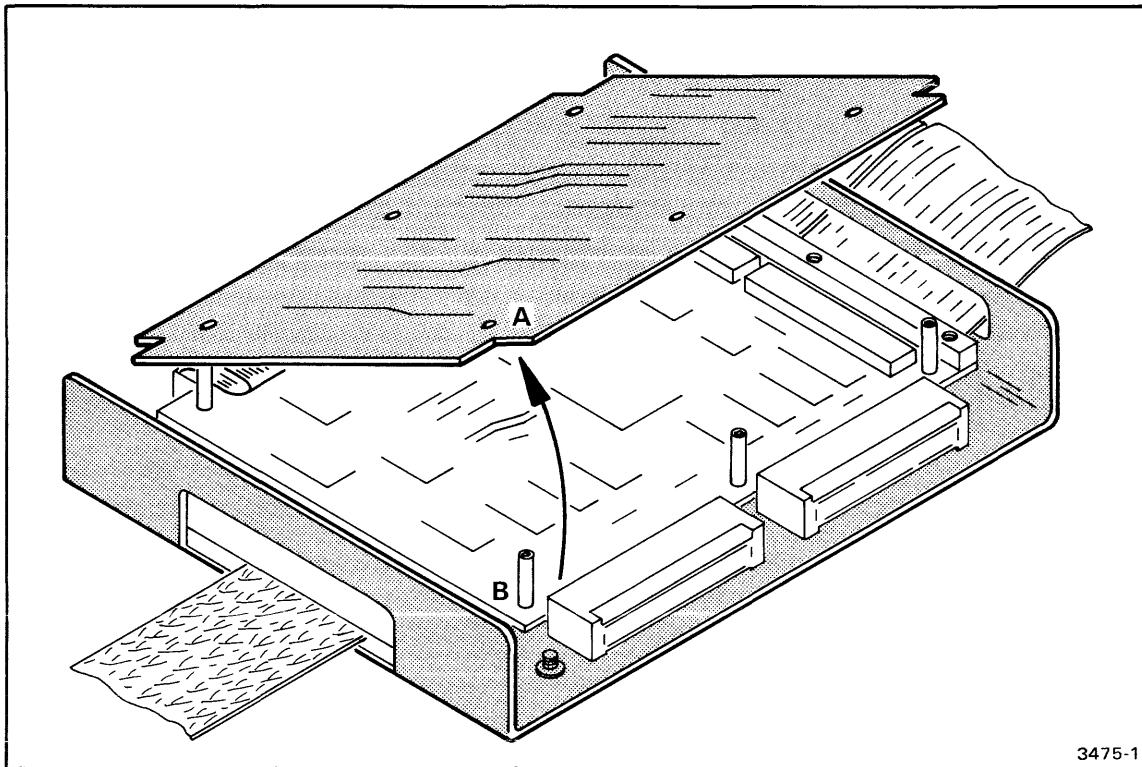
J-1. 6500/1 Prototype Control Probe Interface assembly.
